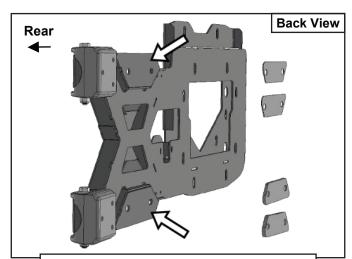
Remove covers from hinges and around hinge anchors. Remove hex bolts attaching hinges to door. Remove rear door
